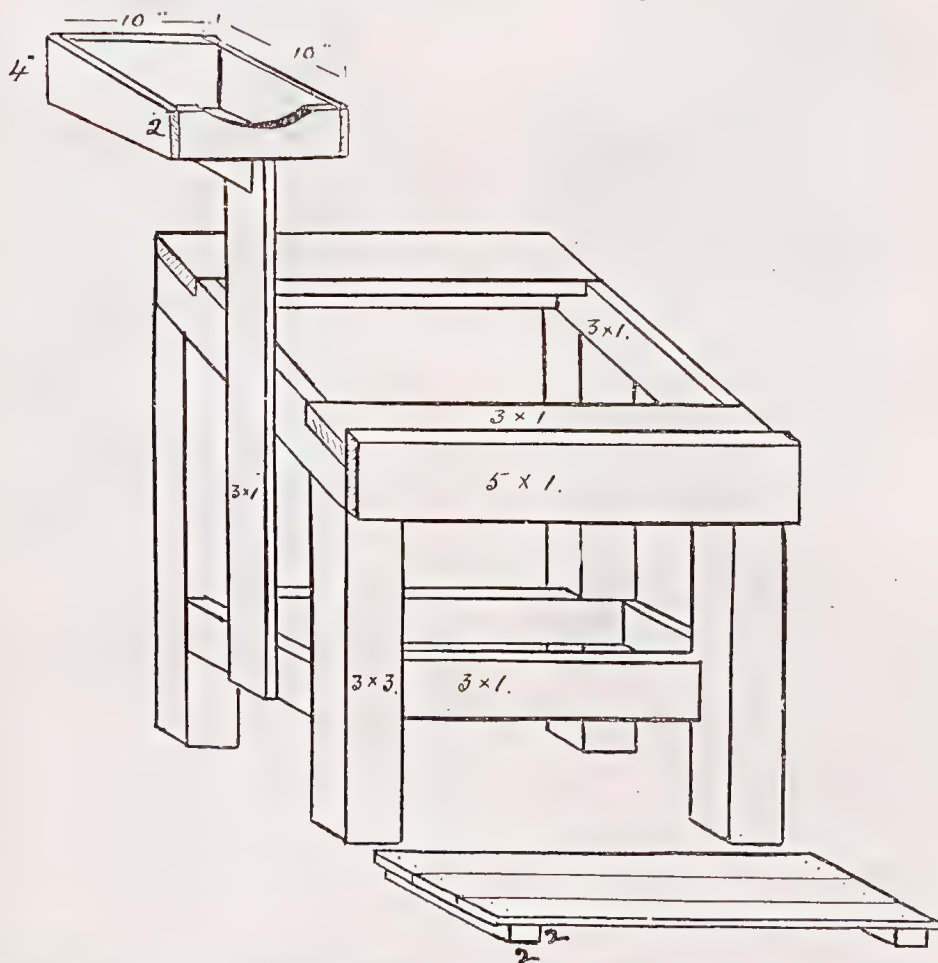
(Fig. 3).—PACKING STAND WITH PAPER HOLDER AND SPRING BOARD.
